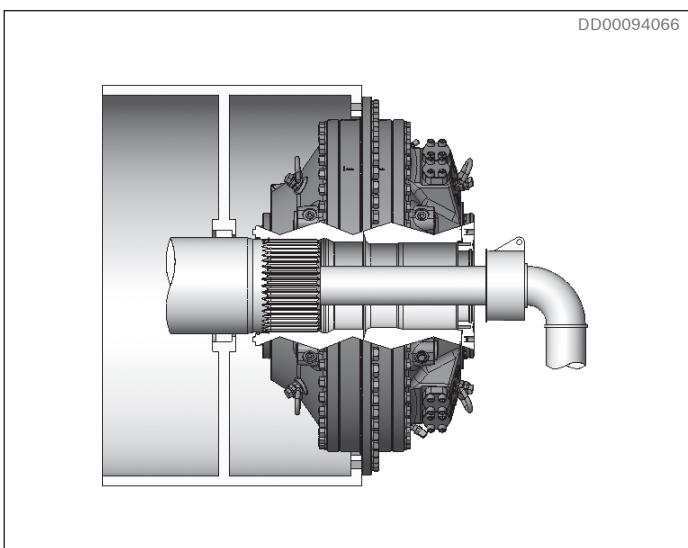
Flange mounted motor with splines and through hole for cooling of the driven machine.
